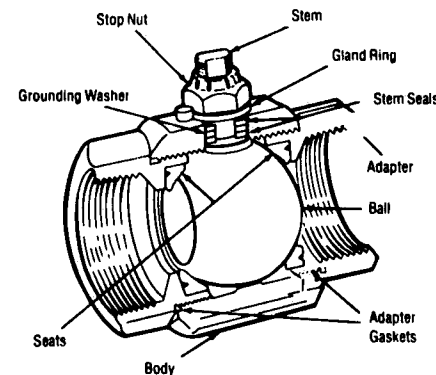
BALL VALVE SEAL REPLACEMENT.
